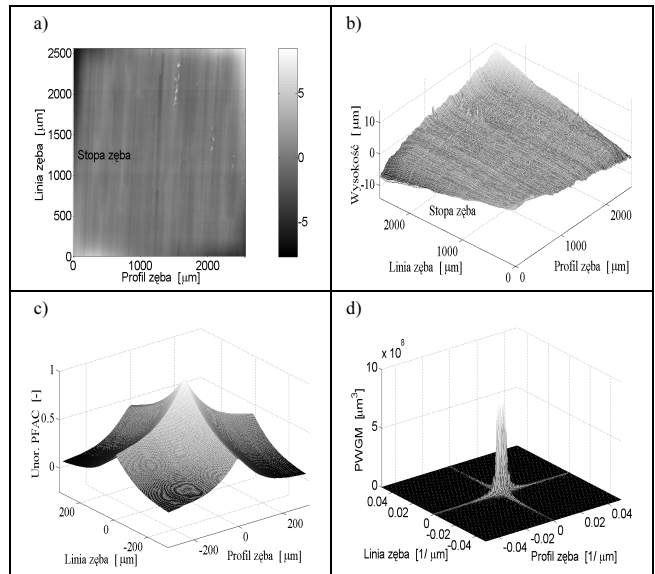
Pseudo-colour image (a), isometric view (b), areal autocorrelation function (c), areal power spectral density function (d) of tooth flank getting out from machining surface topography after hobbing cylindrical gear wheel
